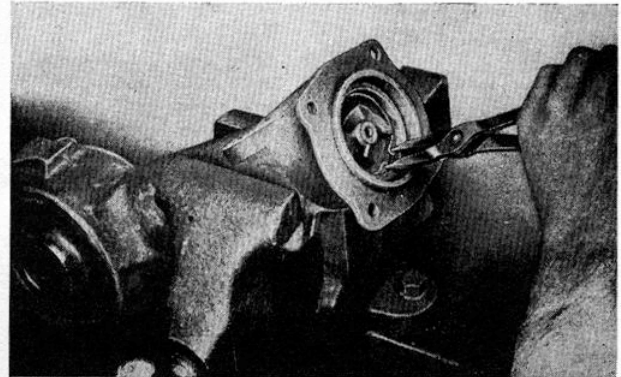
REMOVING CLUTCH DOG RETAINING SNAP RING
